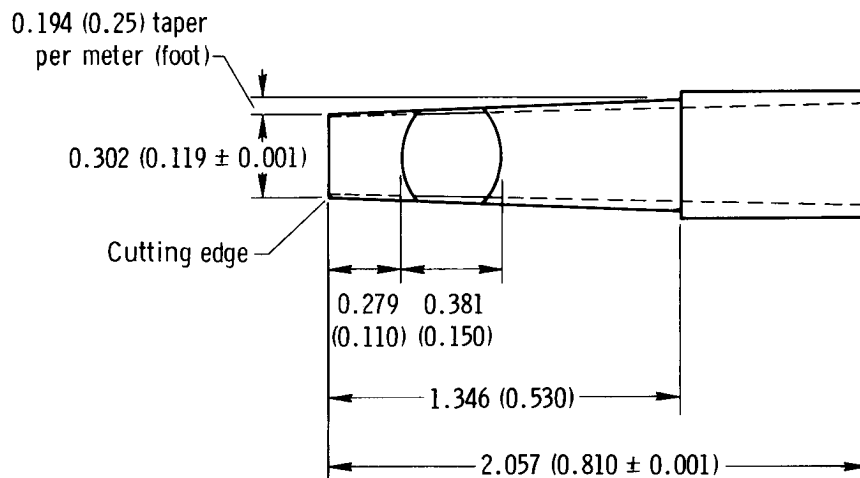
Sketch of the external tubing static orifice cutter. Dimensions in centimeters (feet).
